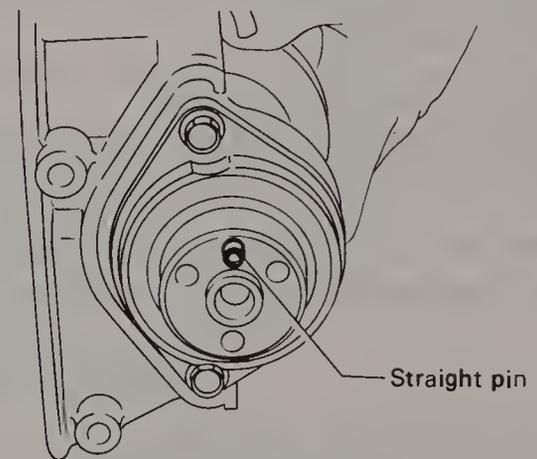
Position the camshaft pin as shown to install the new O-ring (Sec 5)
